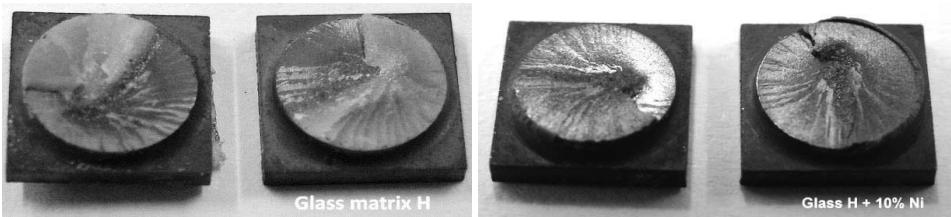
Fracture of hour-glass samples after the torsion test measearument. All the composite sealants showed similar fracture patterns.
